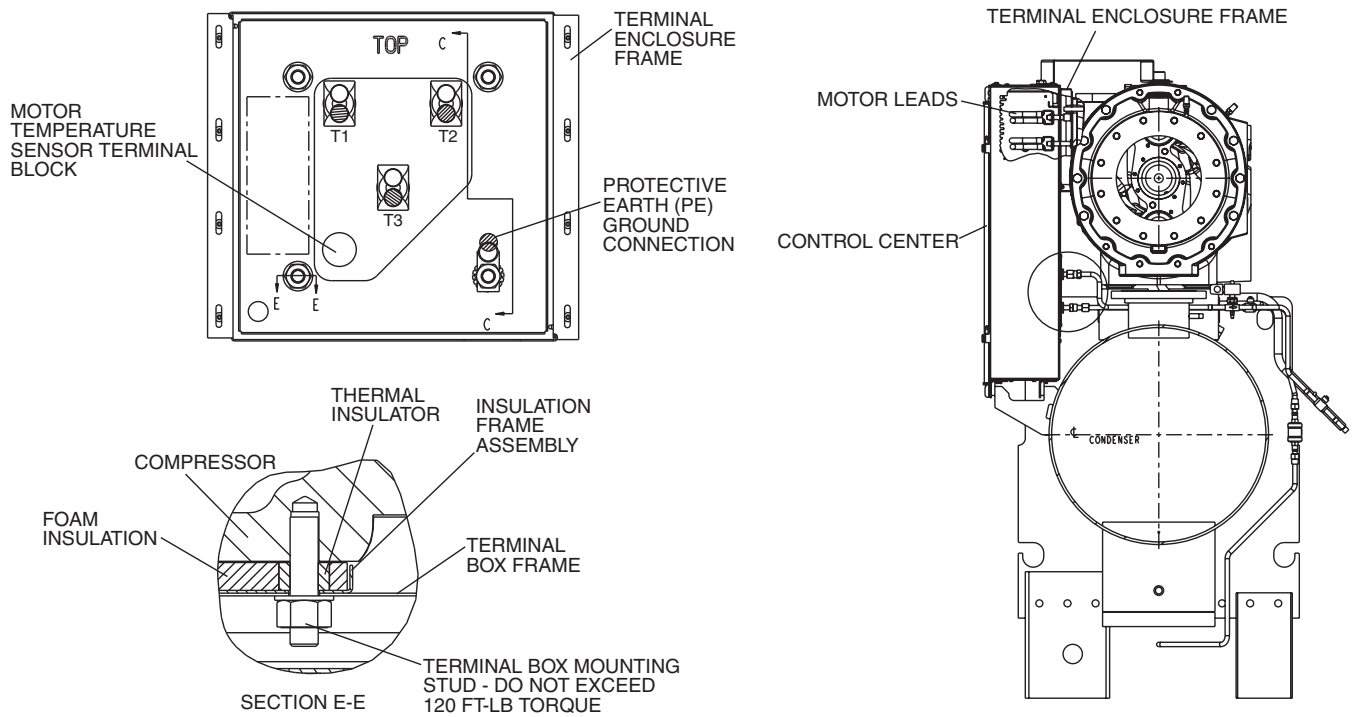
Motor Terminal Box (Q and R Compressors)
